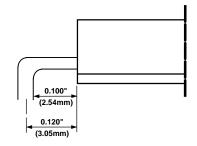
Minimum Bend Radius of 40 Mil (1.02 mm) Pins
